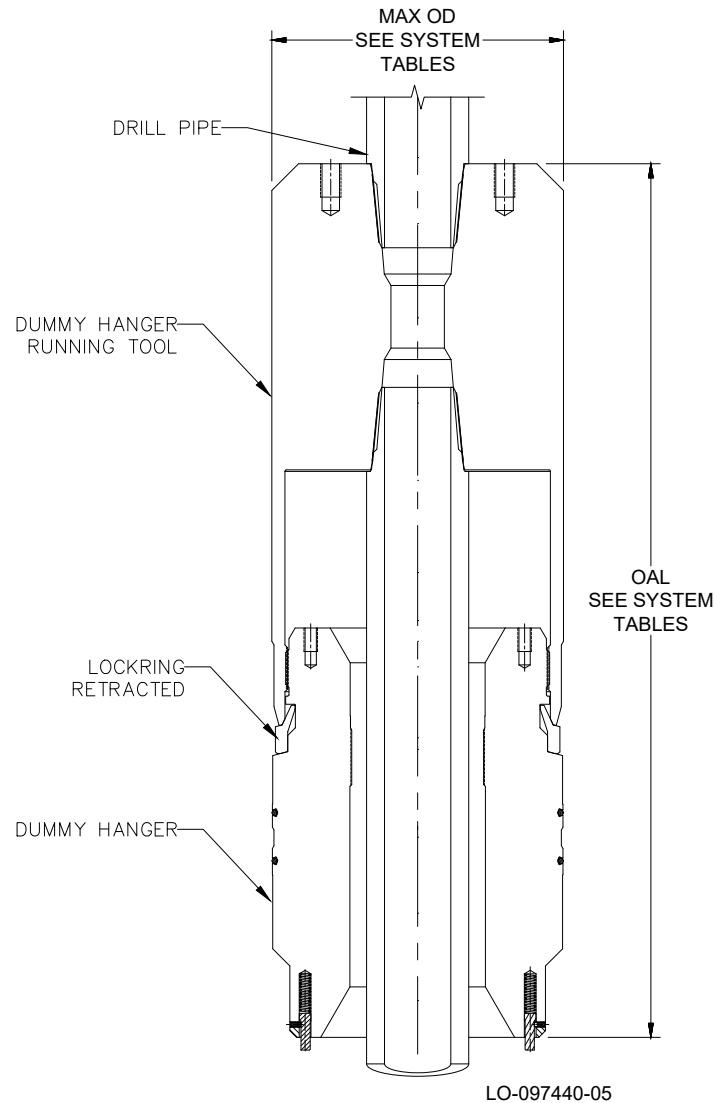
Dummy Hanger/ Dummy Hanger Running Tool Assembly
